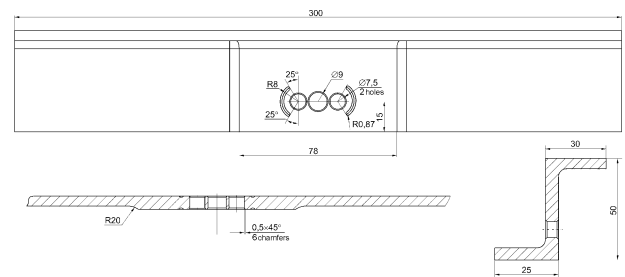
Stringer with Three Holes of  $\varnothing 7.5$ – $9$ – $7.5$  mm Processed by Stamping Segment Shape Craters Test-Piece
